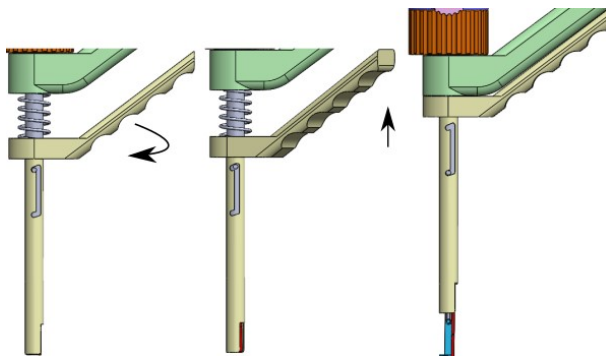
Side view of the shaft of the grasper which demonstrates outer shaft movement. The surgeon is able to push the handle of the outer shaft clockwise with his fingers. Because of this, the pin lines up with the vertical cut-out. The tensioned extension spring pulls the outer shaft towards the handle and the pin falls in the lower slot which aligns the lower cut-out with the suction surface. Now the suction surface is able to rotate. The surgeon now also grasps the handle of the outer shaft together with the main handle to control the instrument.
